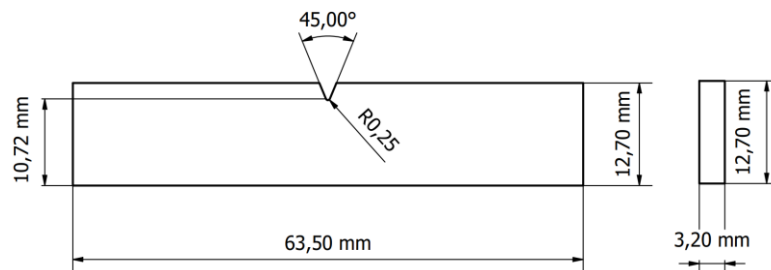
Dimensions of Bending Test Specimens Designed Based on ASTM D256.
